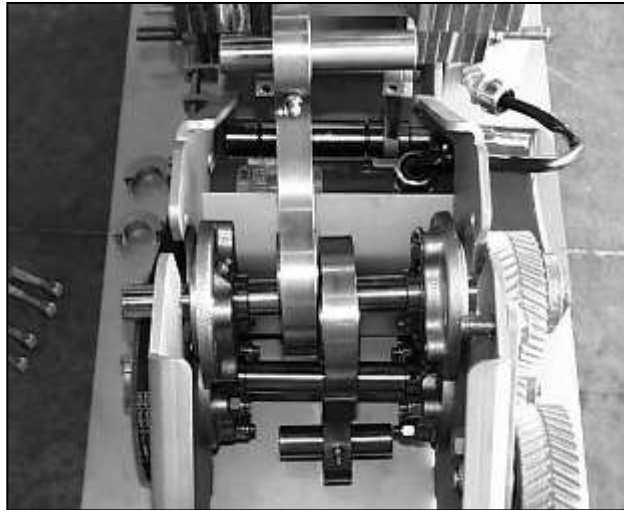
Pushing Flange Bearings toward Center of Drive
